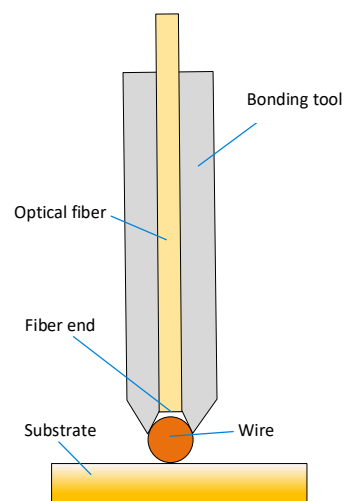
Schematic bonding tool design for direct wire heating with open tip
